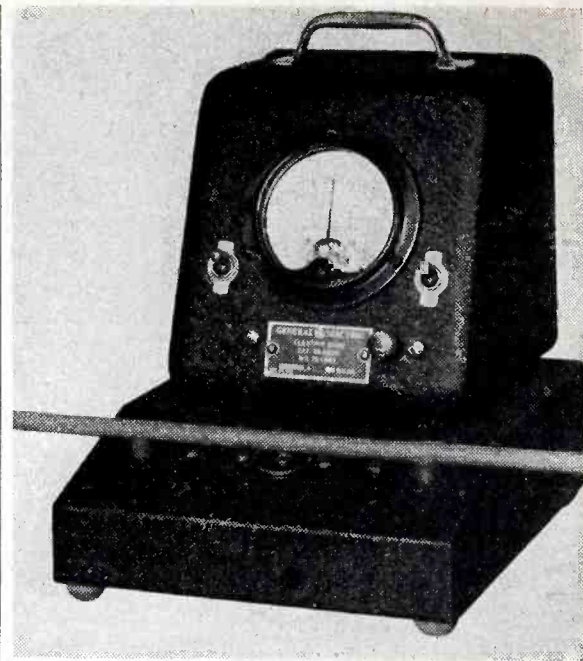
The eccentricity of flux coatings on welding electrodes can be determined by the gage shown above. Four buttons of tungsten carbide hold the rod at the proper distance from the gage head mounted in the base
